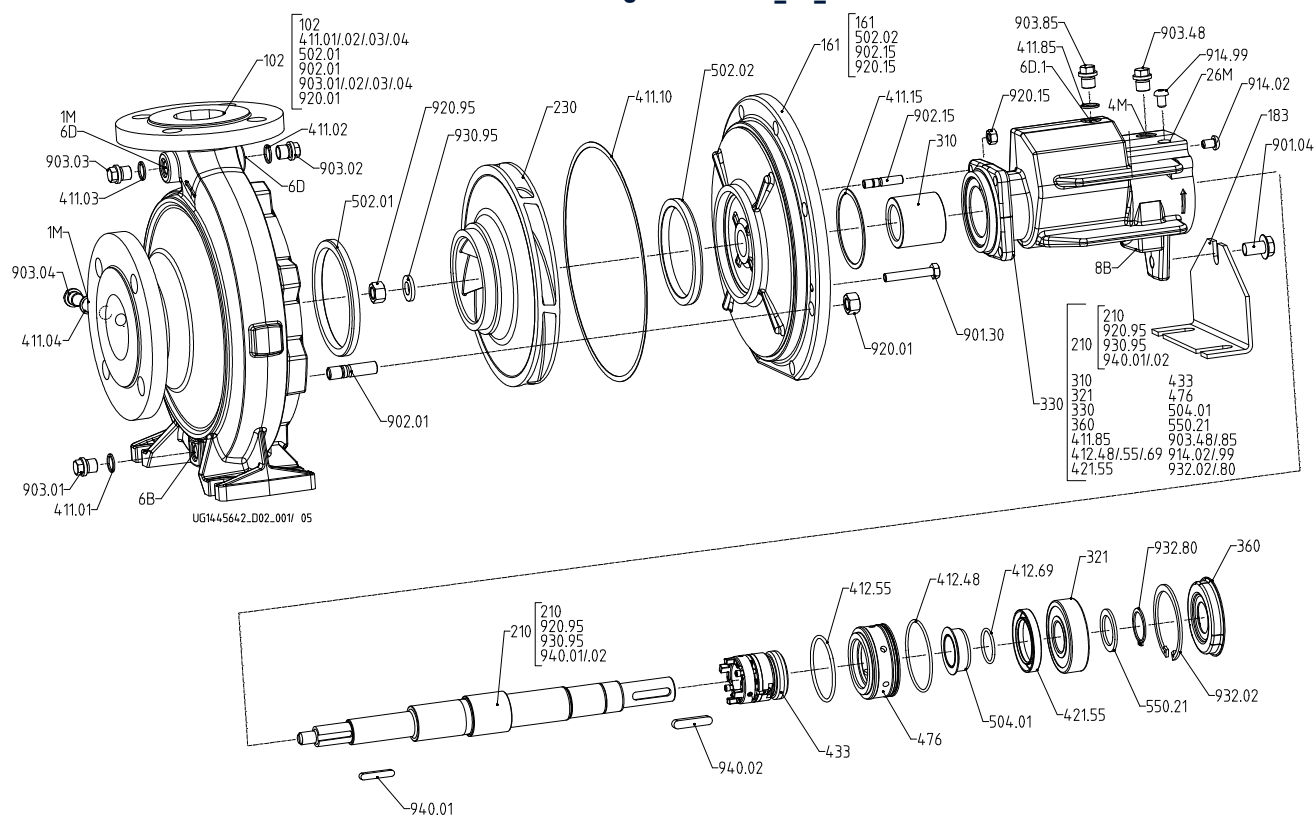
Exploded view of Etanorm SYT, bearing bracket WS_25_LS
